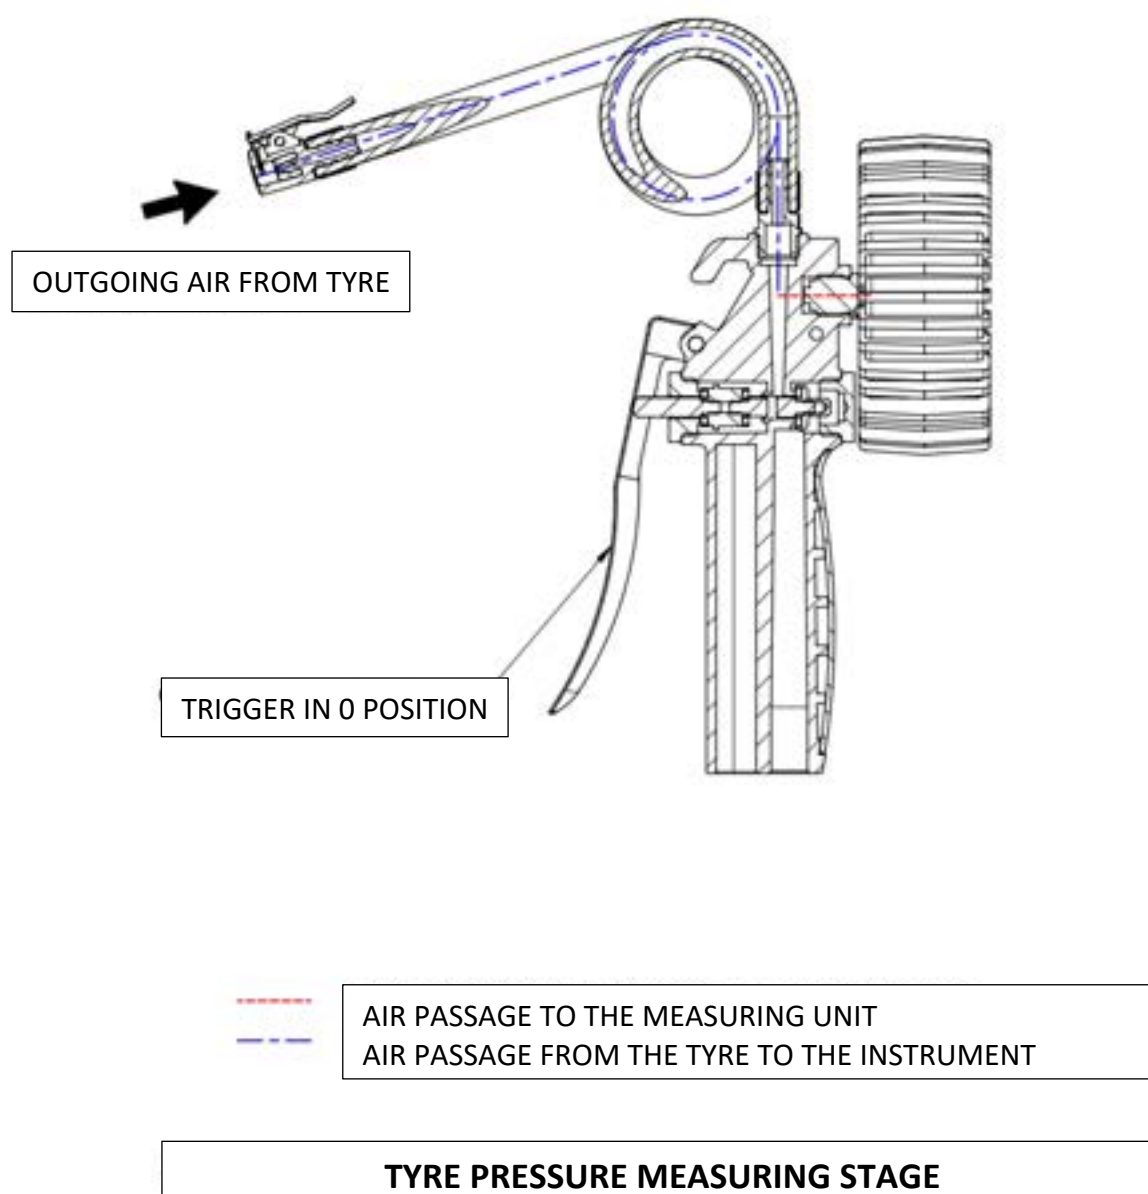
TYRE PRESSURE GAUGE “60 G/T” (vers. 63 mm)
